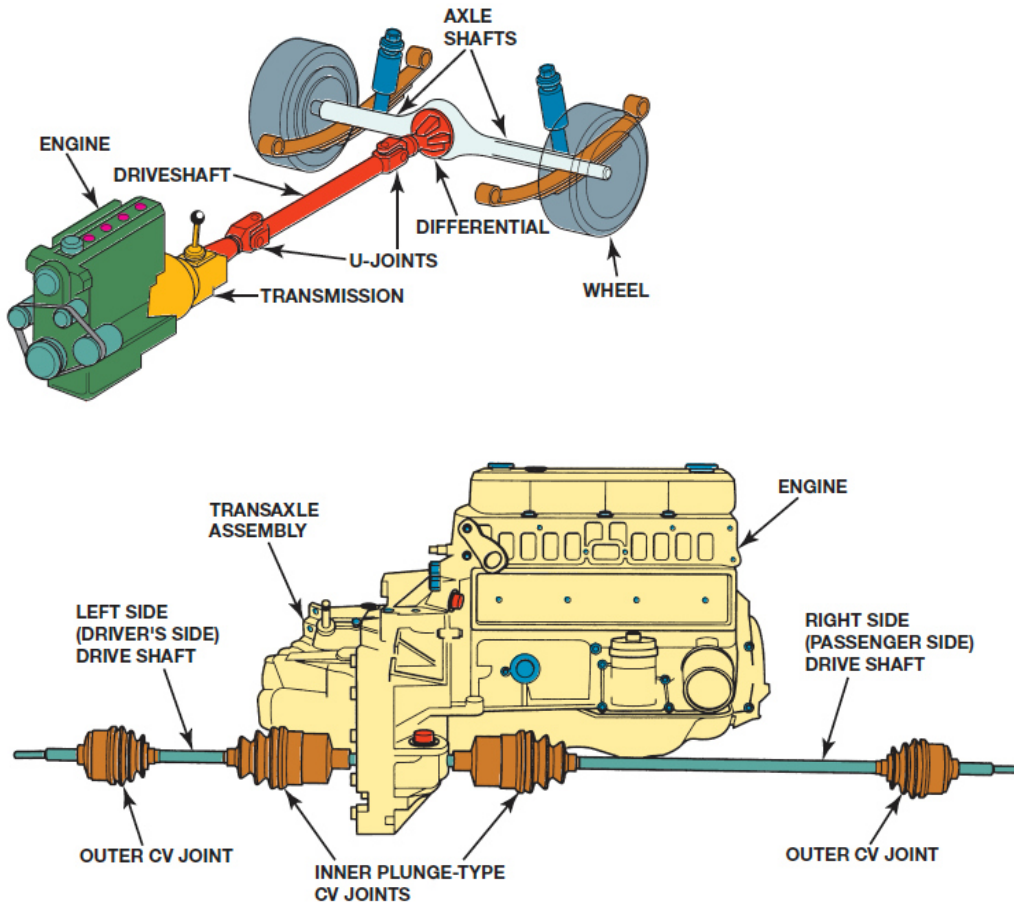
Rear-wheel-drive and front-wheel-drive shafts.
